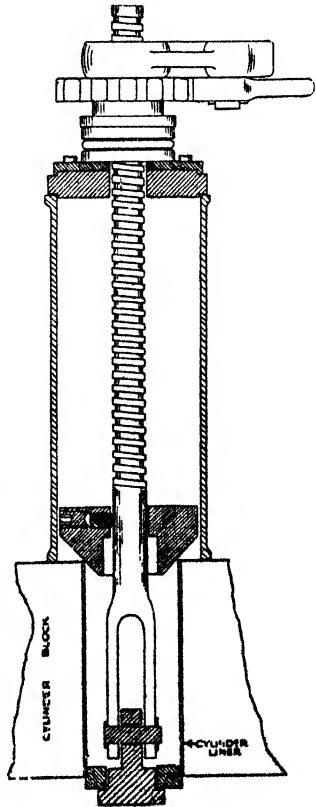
Removing Cylinder Liner with Buma Tool.
